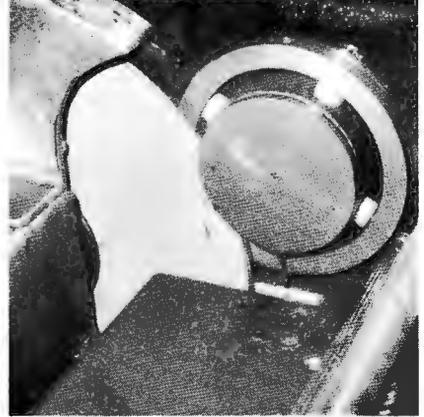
illustrates a fixture which is used to support long work of all kinds, the fixture moving with the cut-off machine table. The fixture is adjustable for squareness and level.
